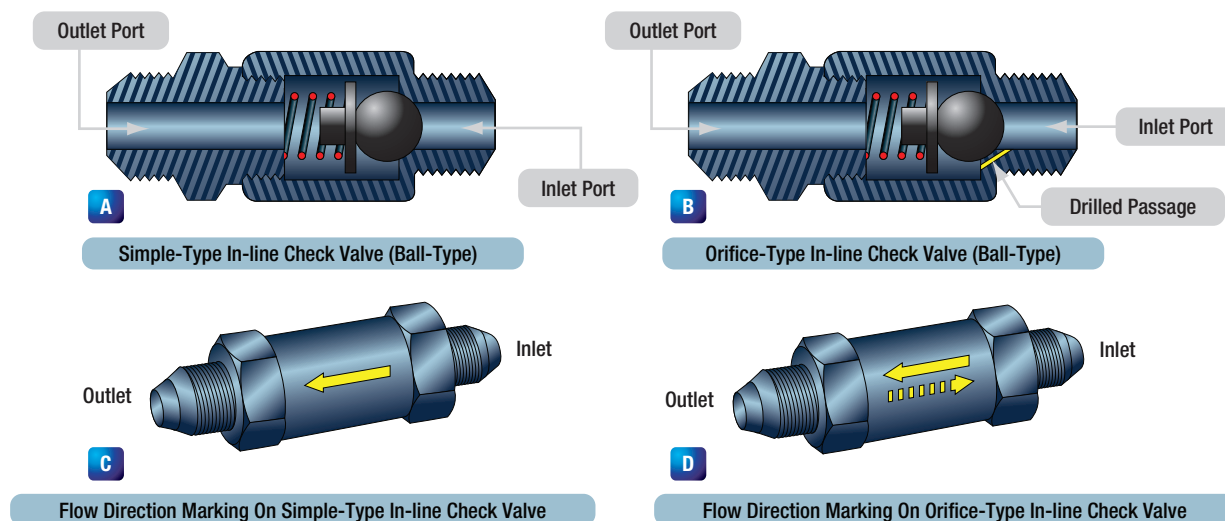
An in-line check valve and orifice type in-line check valve.
